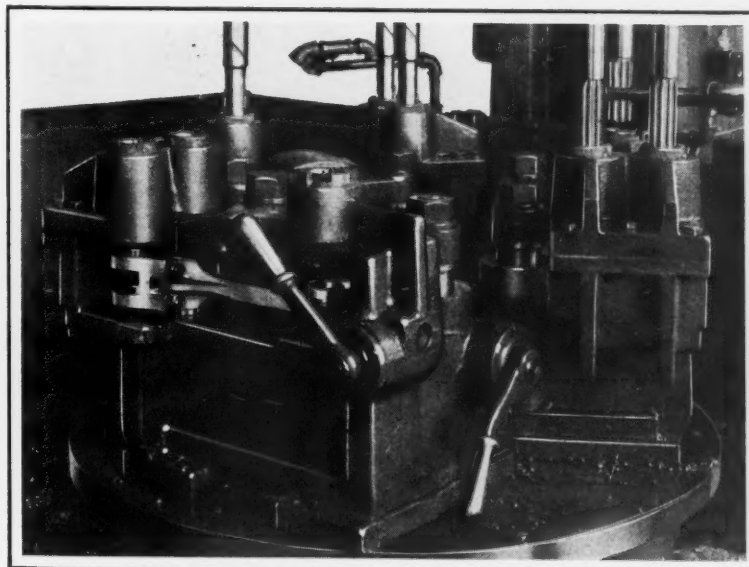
Drilling and Reaming the Wrist-pin and Piston-pin Bearings
